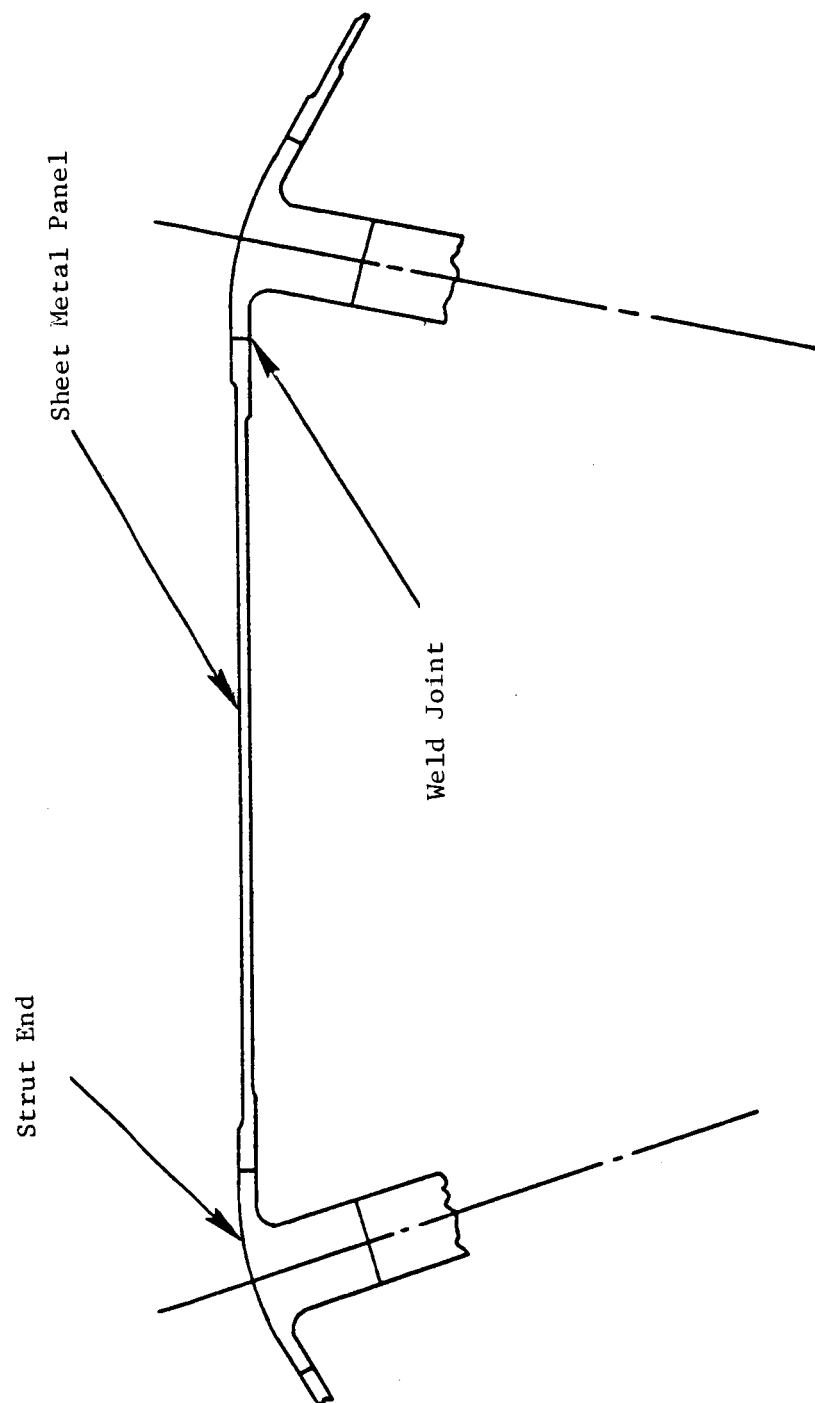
Turbine Frame Casing Panel Chem Milled to Reduce Stock Thickness Between Strut Ends.
